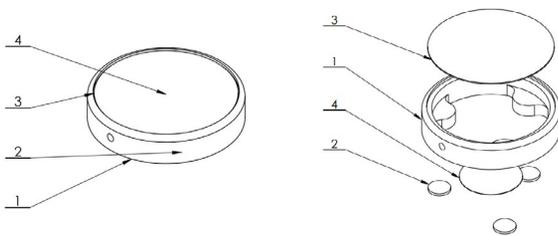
Isometric and exploded views of piezoelectric force sensors: 1 – 3D printed fixture; 2 – magnet – used for fixing the sensor to ferromagnetic surfaces; 3 – passive brass layer; 4 – piezoelectric disc
